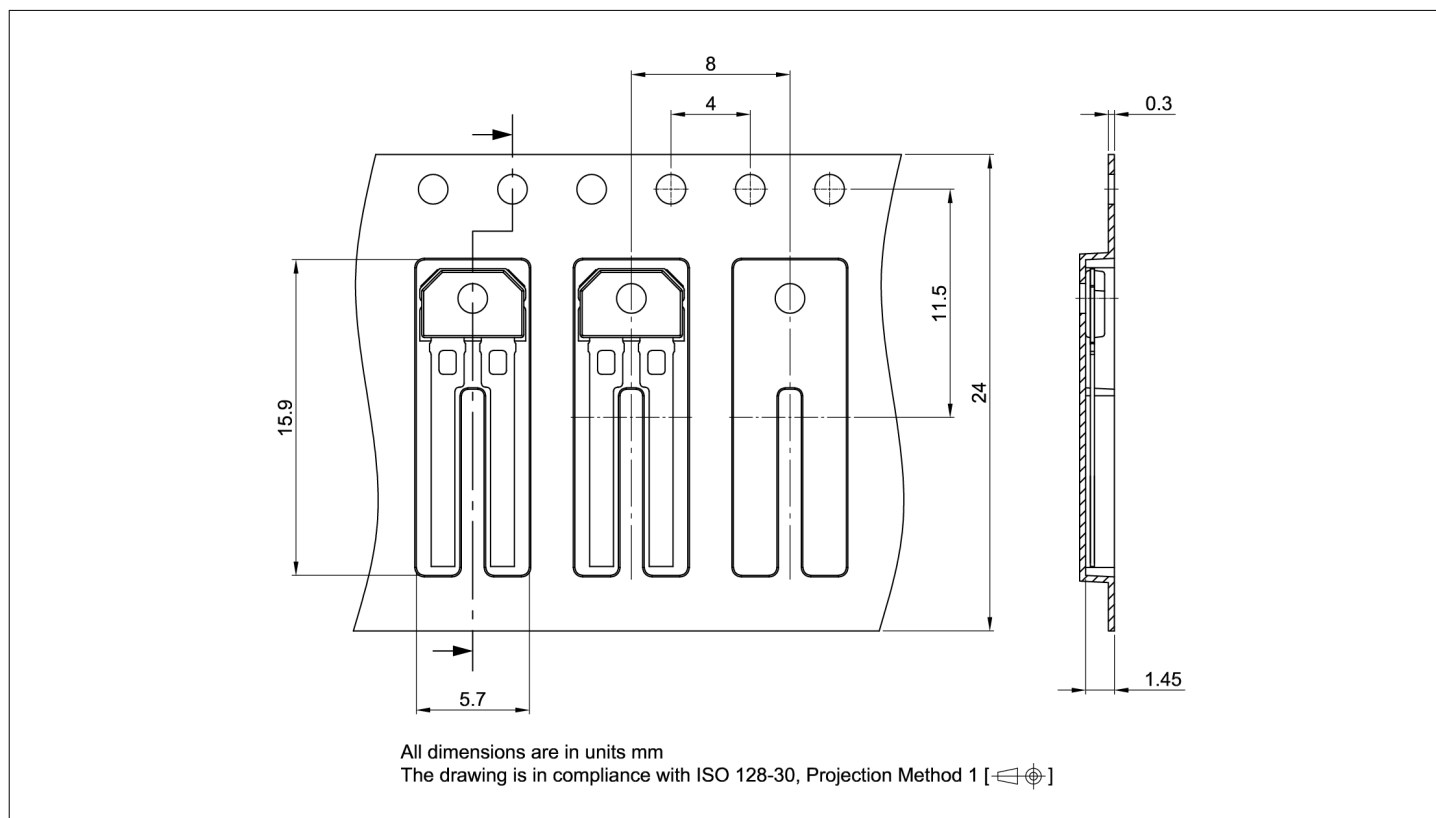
Packing dimensions of PG-SSO-2-51 in blister packing
